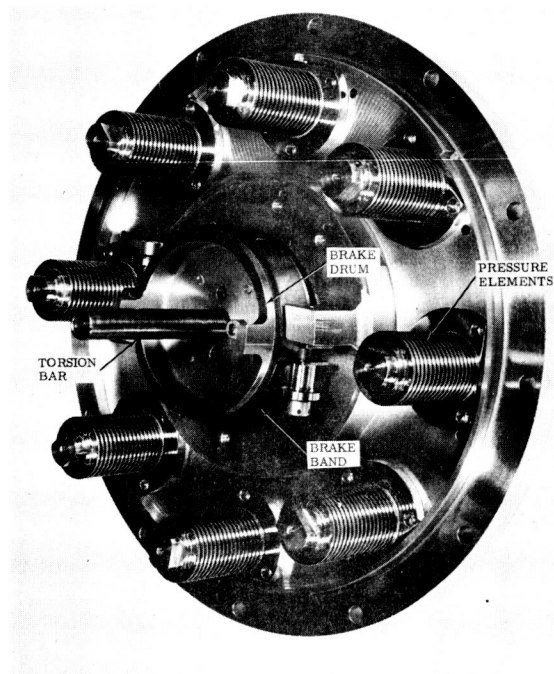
MOUNTING PLATE CONTAINING PRESSURE ELEMENTS AND SNUBBER MECHANISM
